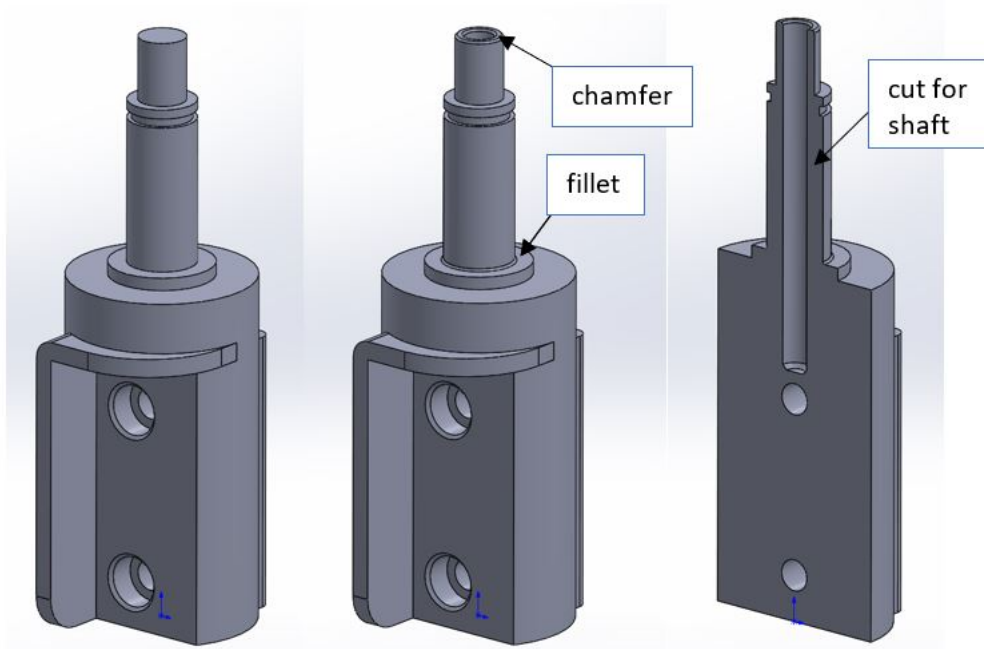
The CAD models for the original pivot joint shaft (left) and for the modified pivot joint shaft with the fillet and chamfer addition (middle) and the cut for metal shaft addition (right).
